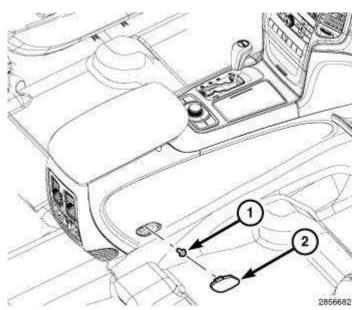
Screw Covers & Screws Courtesy of CHRYSLER GROUP, LLC
